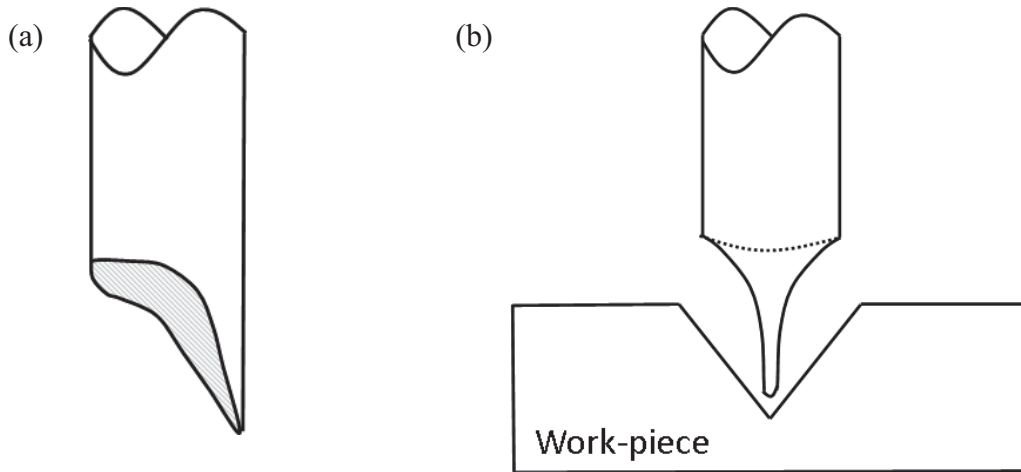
(a) schematic view of a non-uniform tool-electrode tip (b) hole drilling with a needle type tool-electrode.
